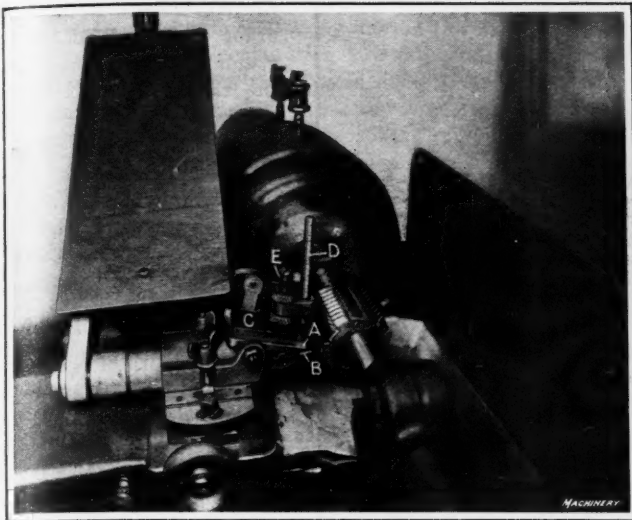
Provision made for truing Grinding Point without removing it from Hob-grinding Machine
